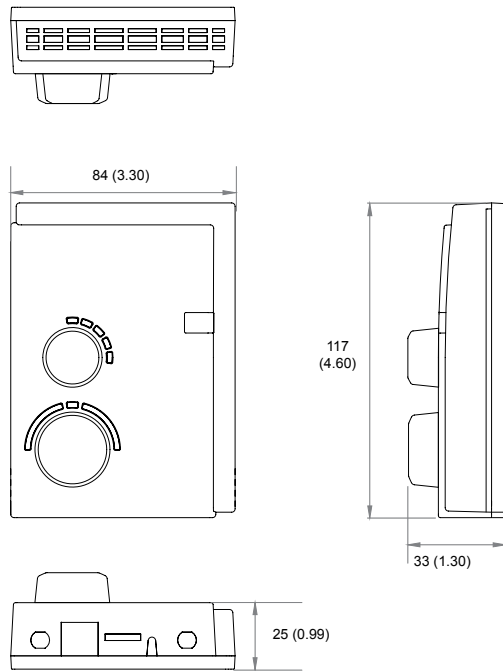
Q.RCU-D-xx - Front view and side view (available knobs depend on model)
